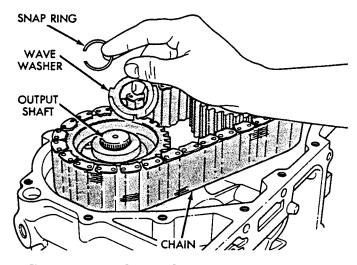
Remove Output Shaft Sprocket Snap Ring and Wave Washer
